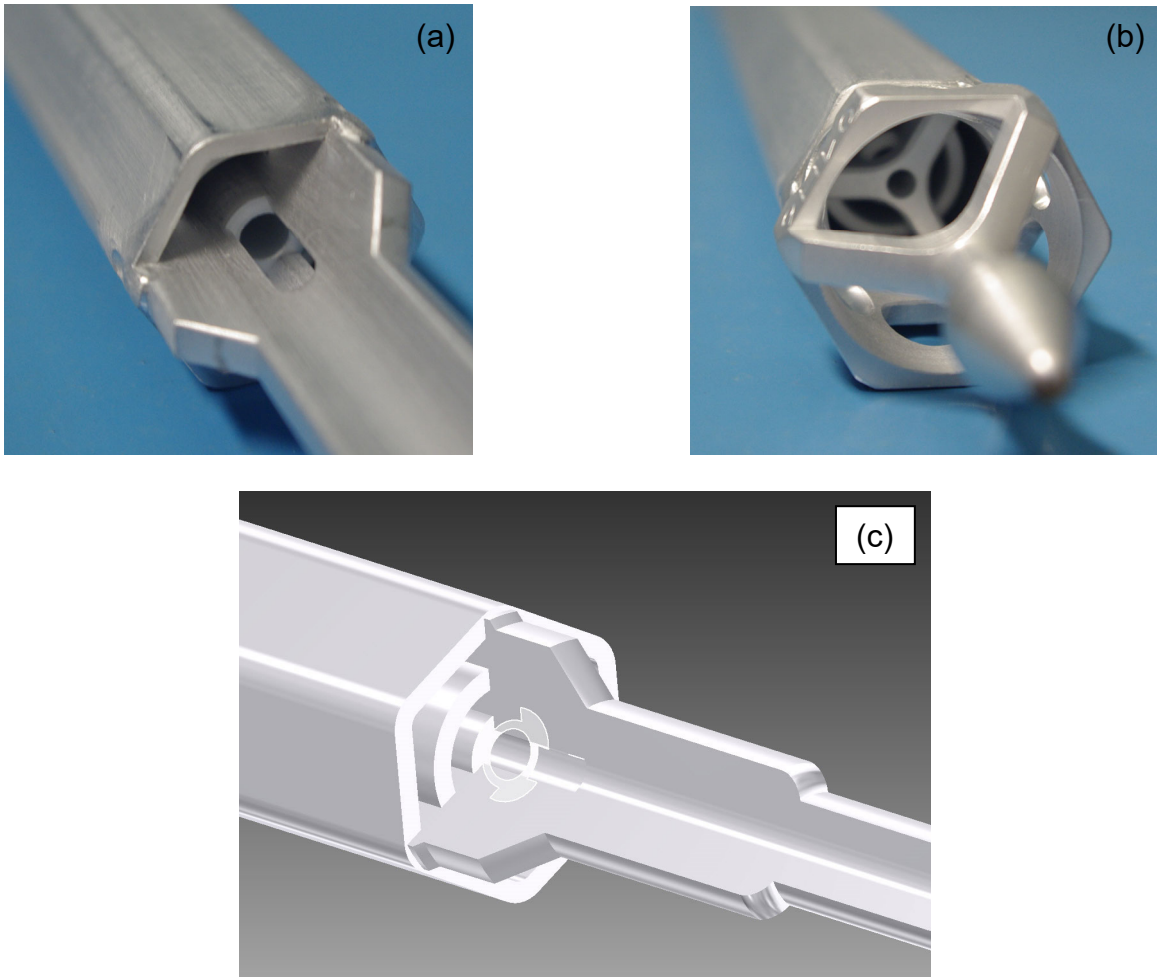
Inlet (b) and Outlet (a and c) Nozzles of the fuel assembly
